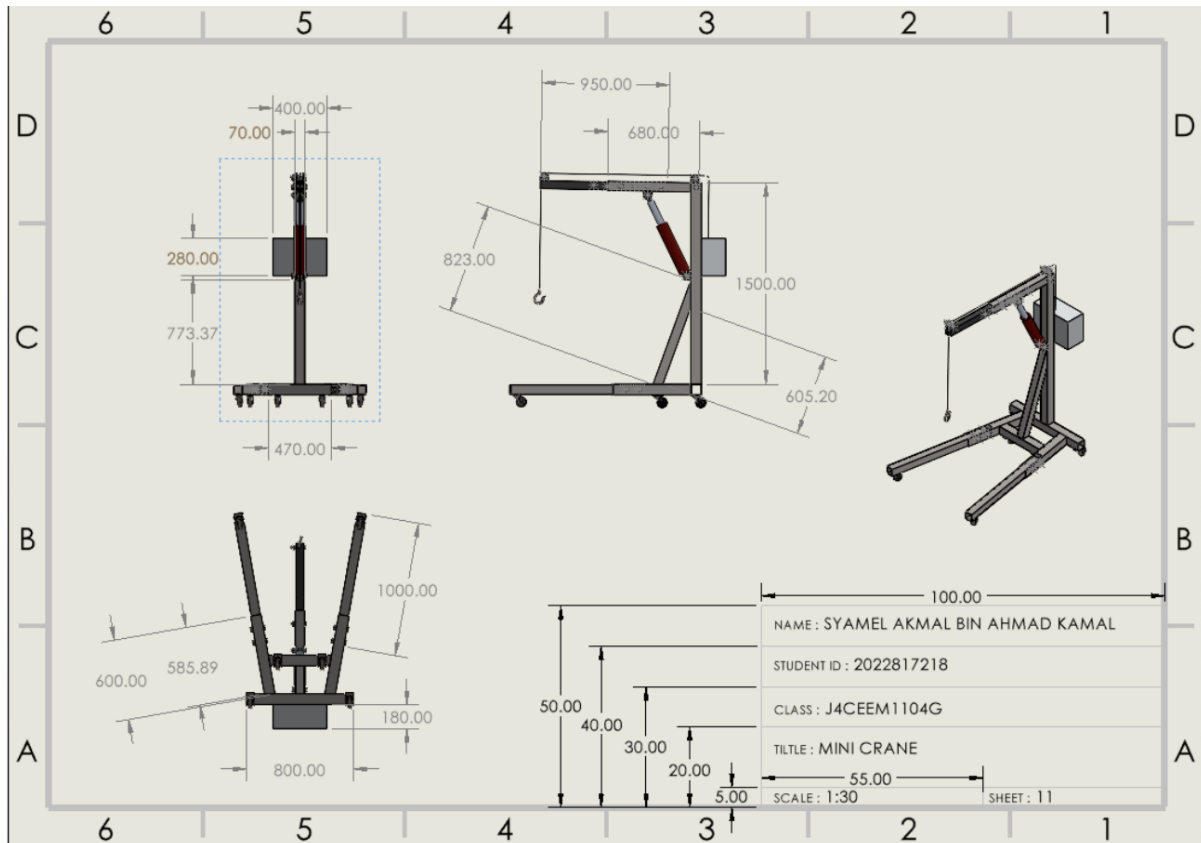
The assembly drawing of mini crane consisting of boom systems, vertical frames, base structures and support members
